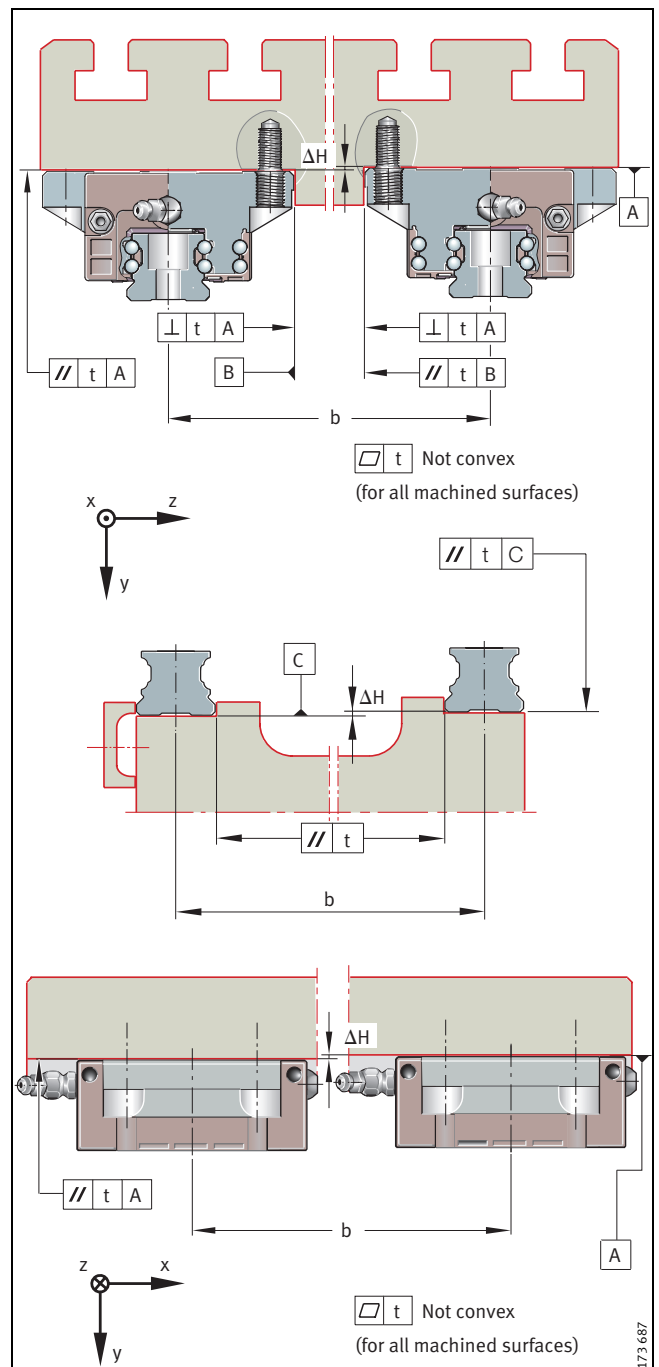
· Tolerances of mounting surfaces and parallelism of mounted guideways
